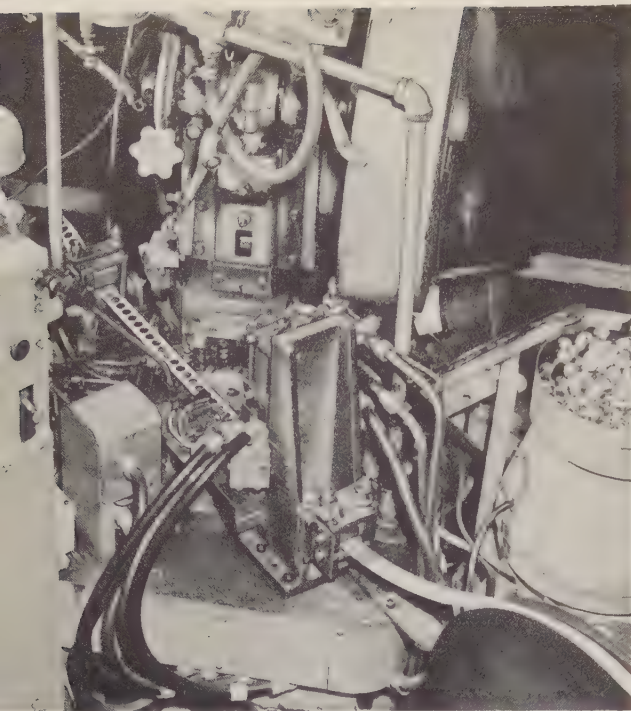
Progressive mechanization was applied to AC's assembly line for fuel pump valve cages in the form of a rotary-type machine which performs several assembly operations, some of which are illustrated by the sketches shown above. The rotary-type machine is operated by a *set-up and operate* man. As the operators, previously used to perform the above sequence of operations, are made available by the installation of these machines, they are placed upon other operations within the manufacturing division. This transition is done on a gradual basis without actual displacement of any employee, but rather with a trend for higher-graded employees for operation of the automatic assembly machine. This machine was conceived and designed by engineers of the Manufacturing Development activity of the AC Spark Plug Division.
